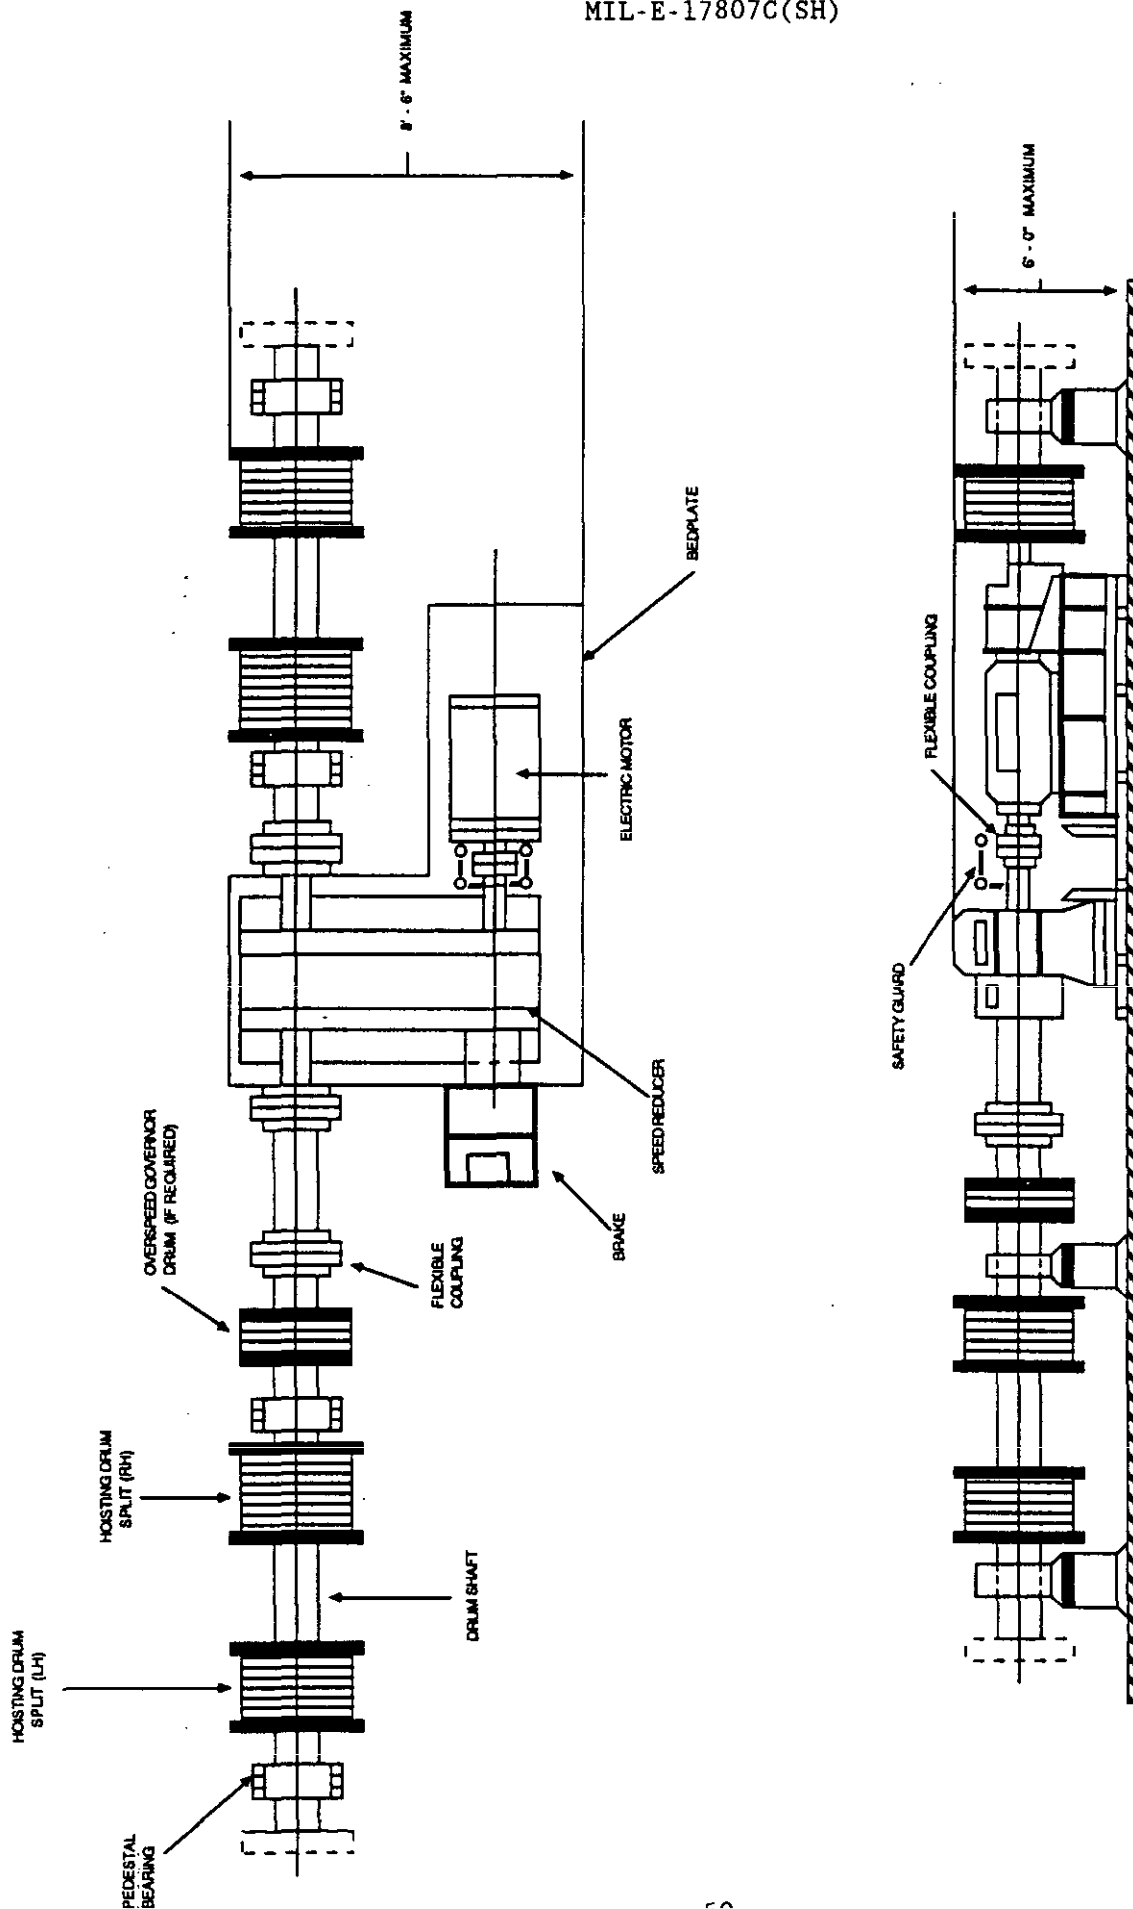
Elevator hoist machinery arrangement (double drums).
